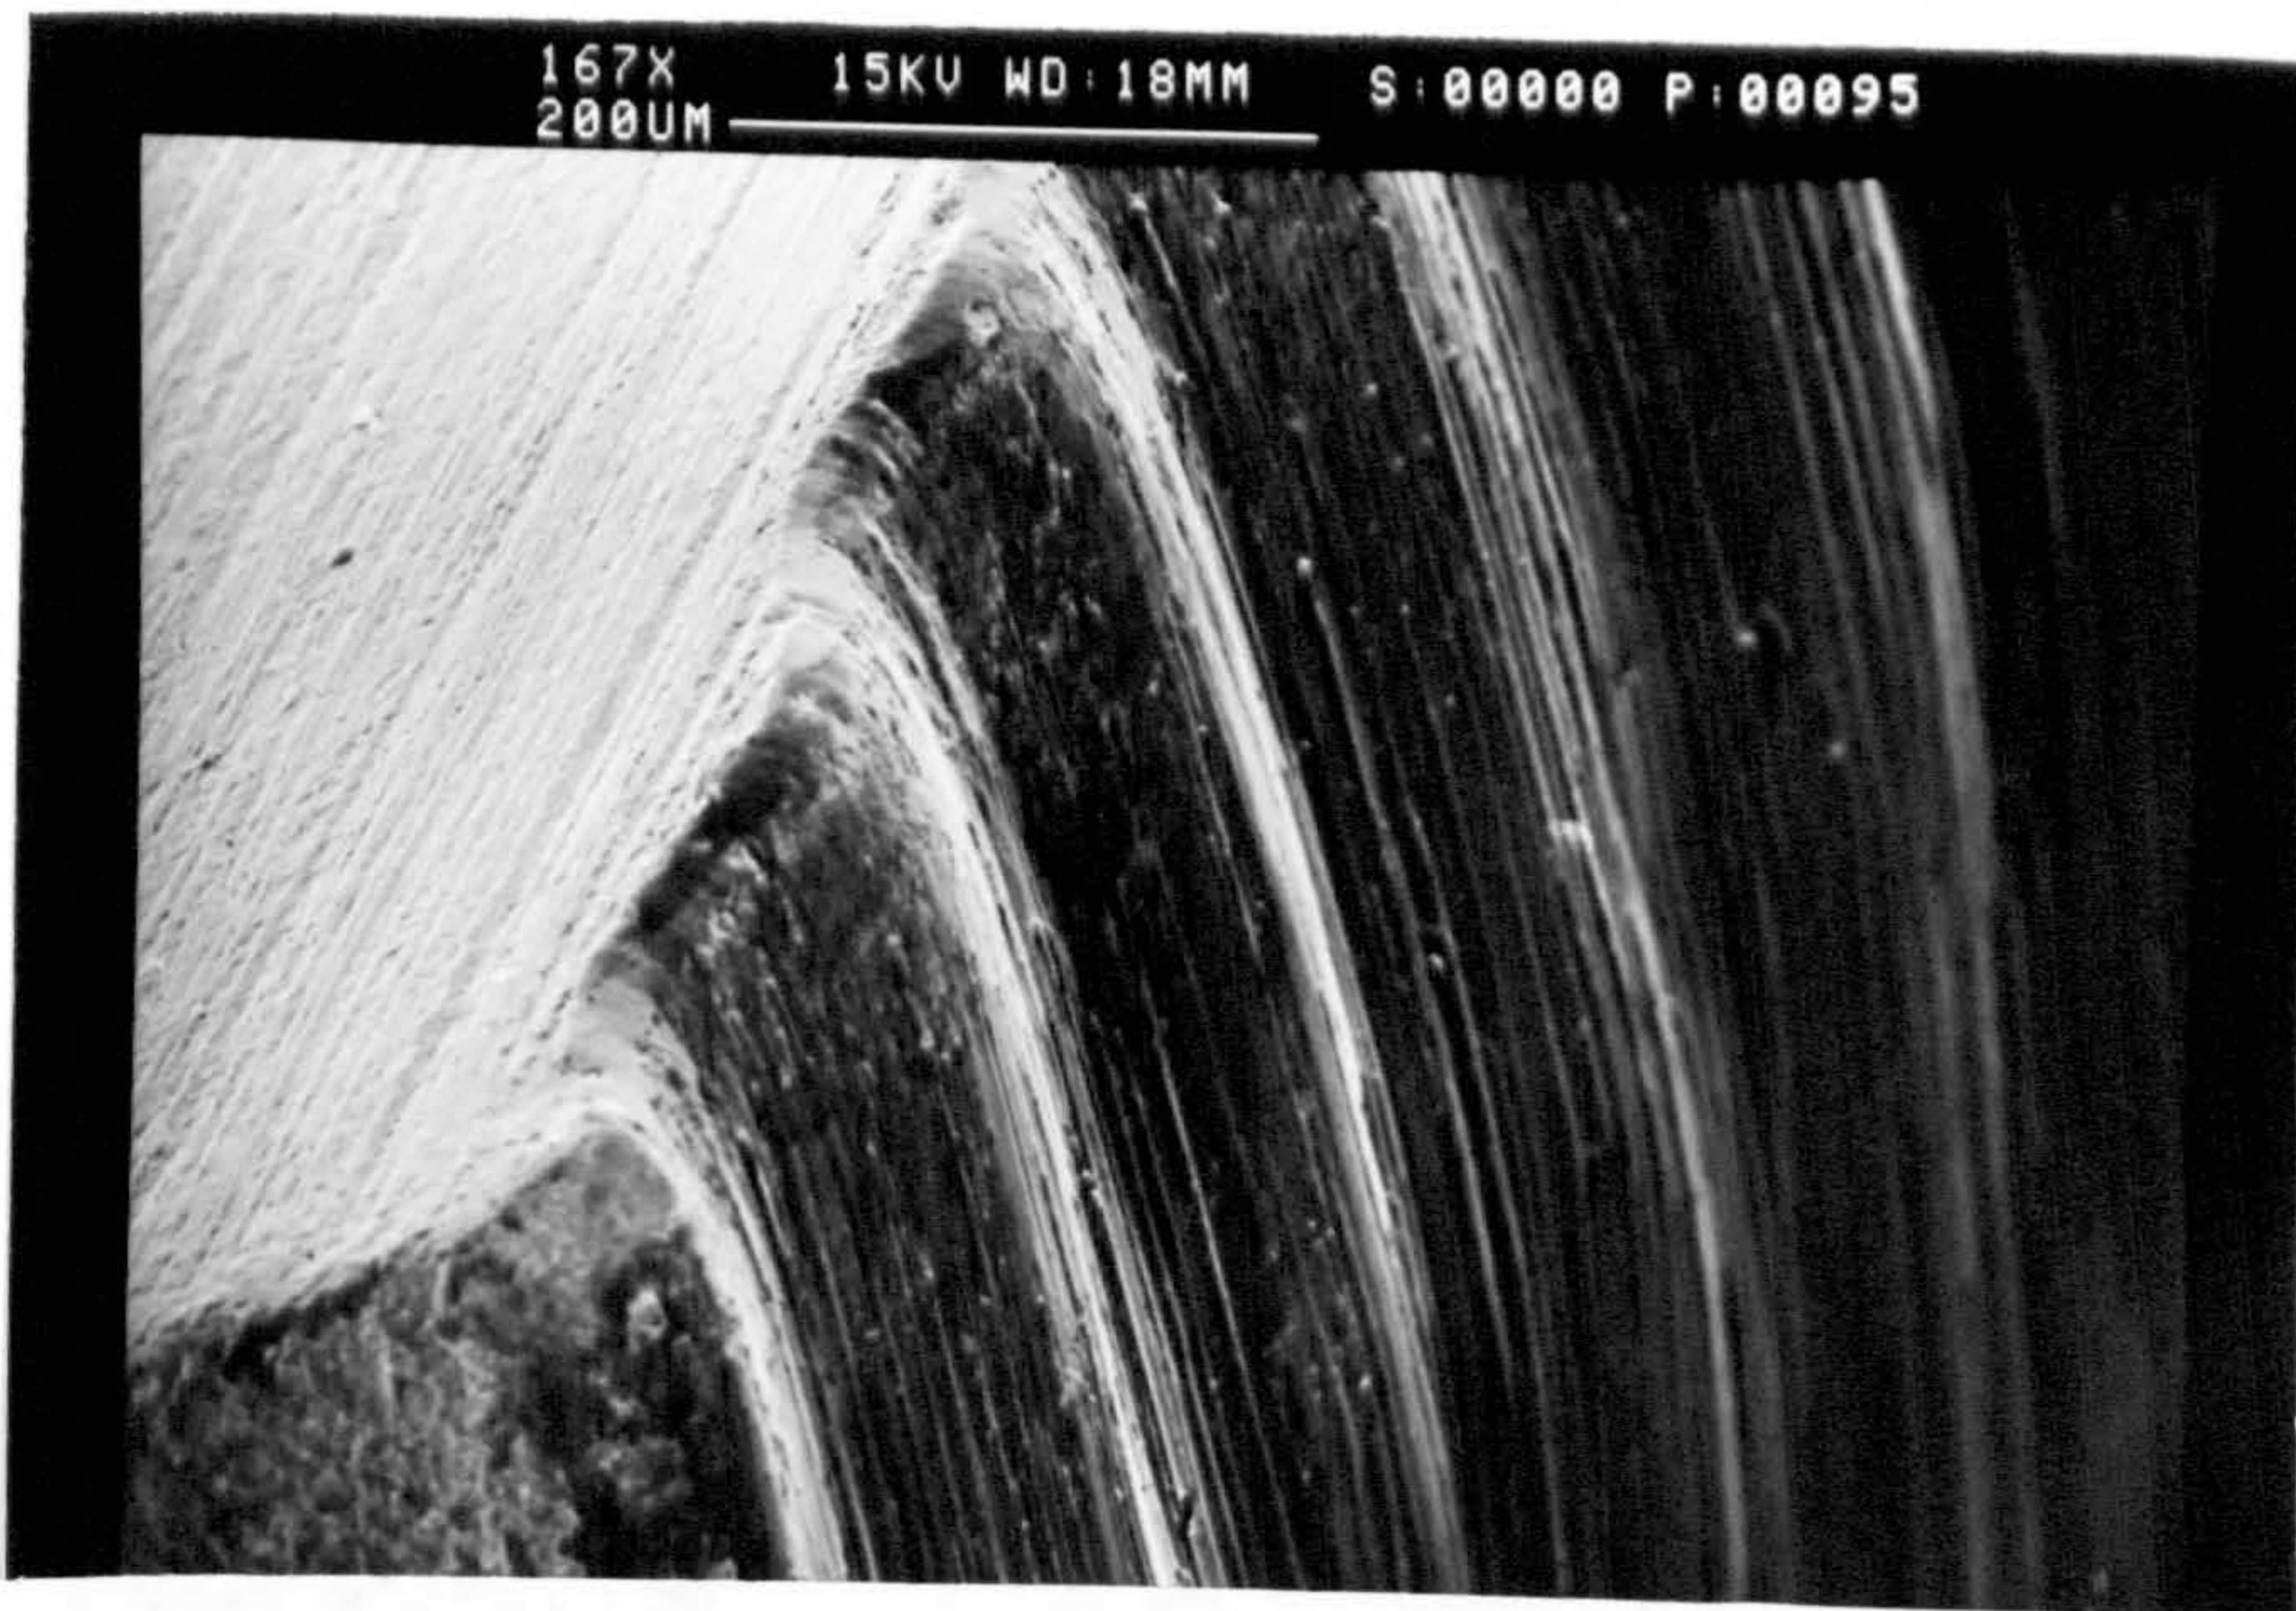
Flank wear land of a HSS tool after cutting at a rake angle of  $30^\circ$  showing ridged structure
